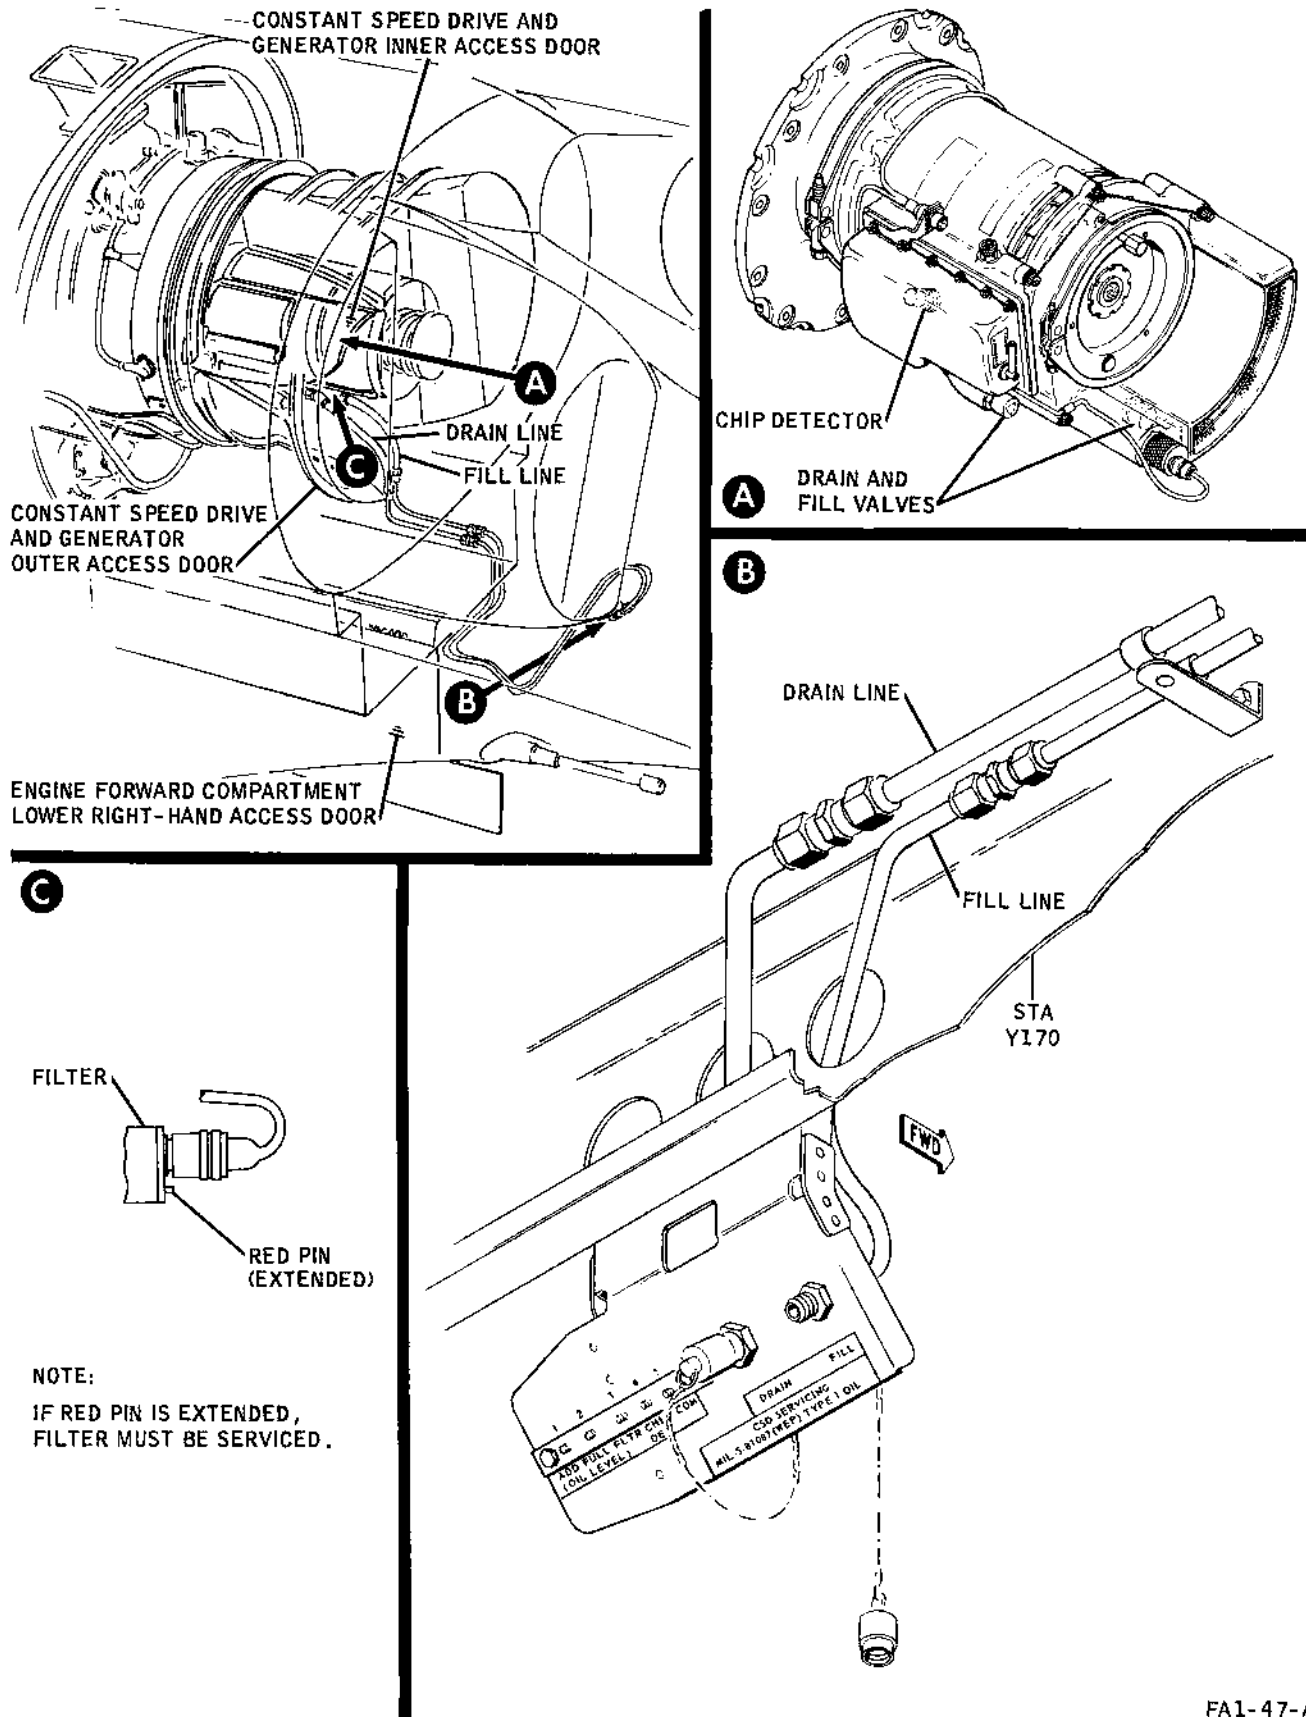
Constant Speed Drive Servicing (Sheet 1)
